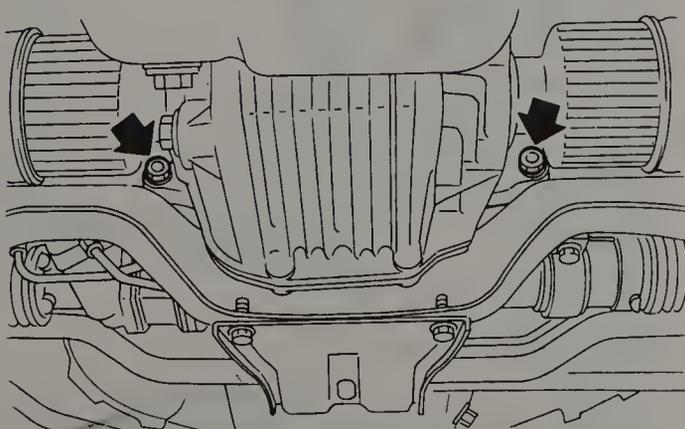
Remove the lower engine-to-transmission nuts (arrows) (Sec 5)
